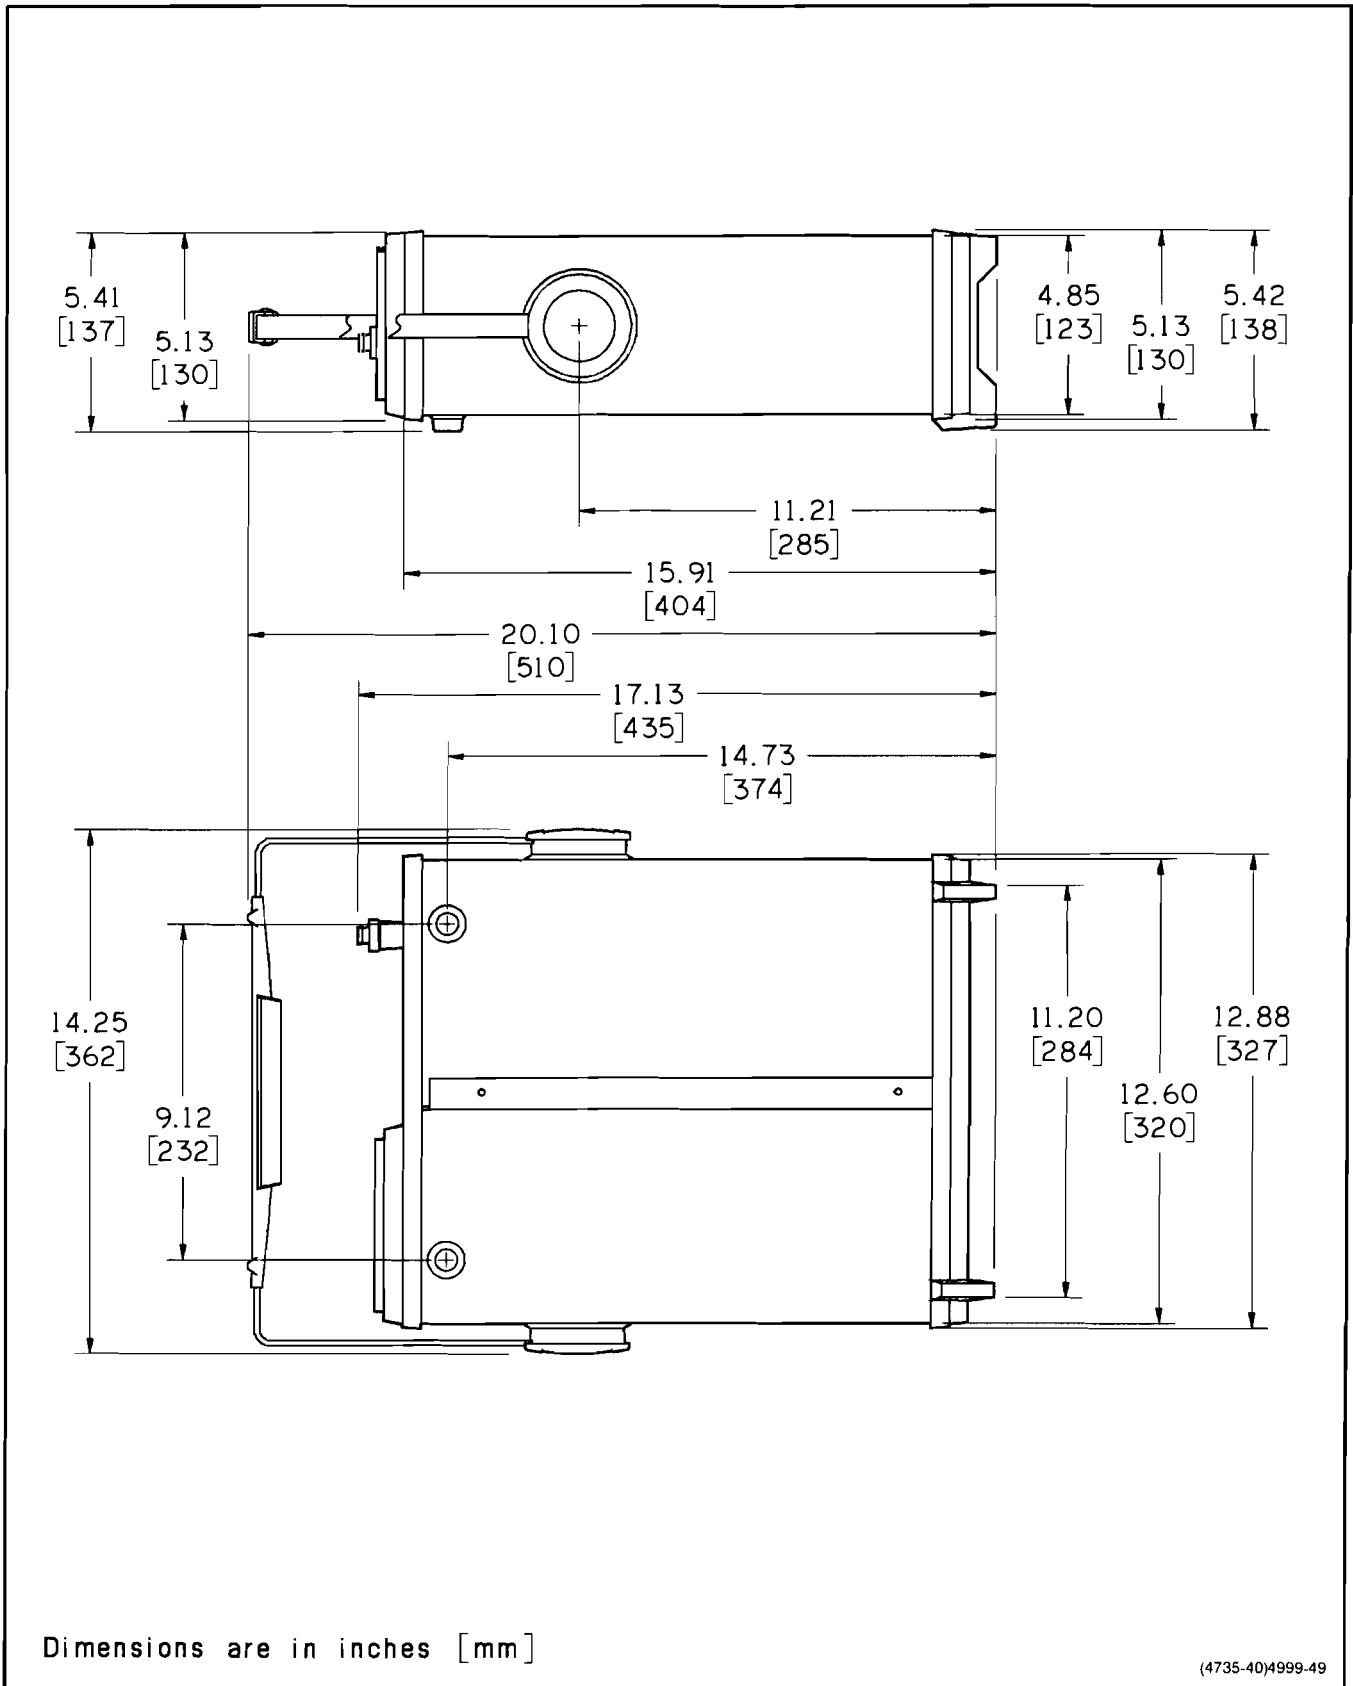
Physical dimensions of the 2230 Oscilloscope.
